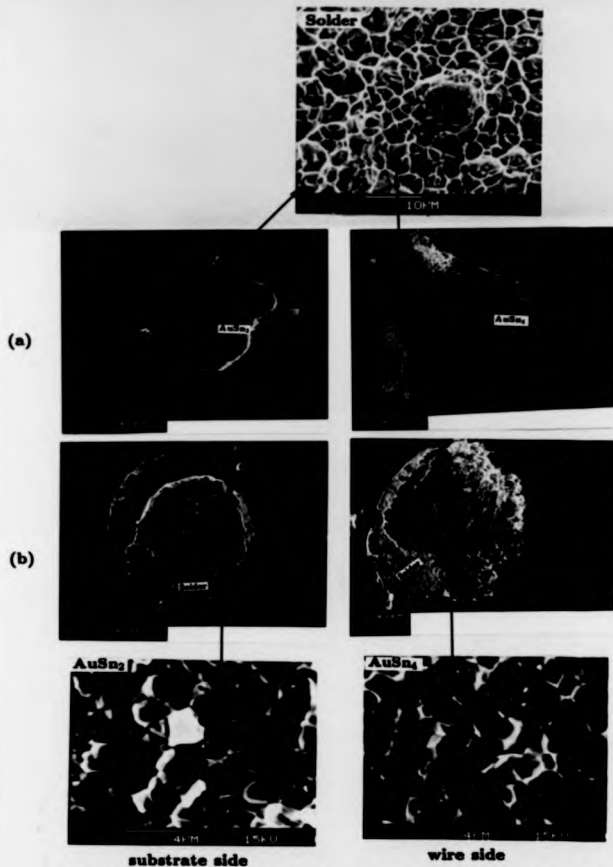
4. SEM micrographs of the fracture surfaces of a Au/62Sn36Pb2Ag joint pulled to fracture after aging at 80°C for (a) 188 hours, (b) 262 hours.
